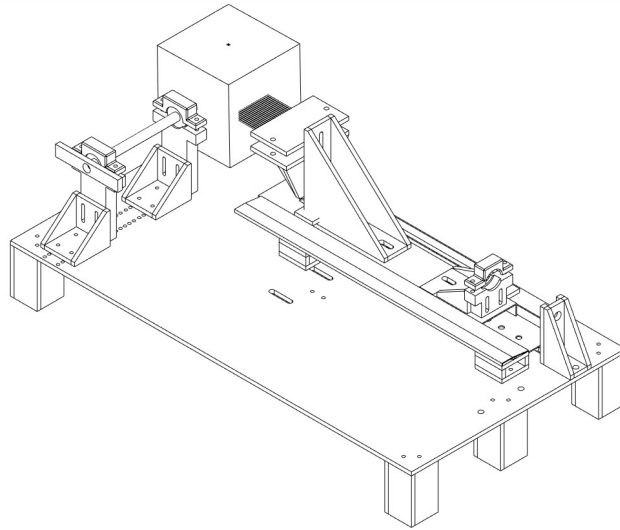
A drawing of the brush, the body and the supporting rig assembled.
